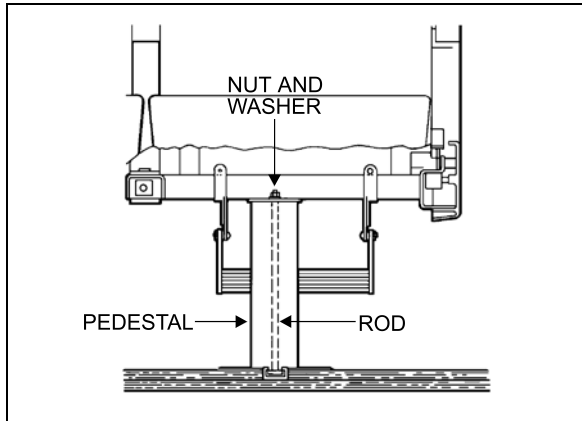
SEAT PEDESTAL ASSEMBLY 18107
